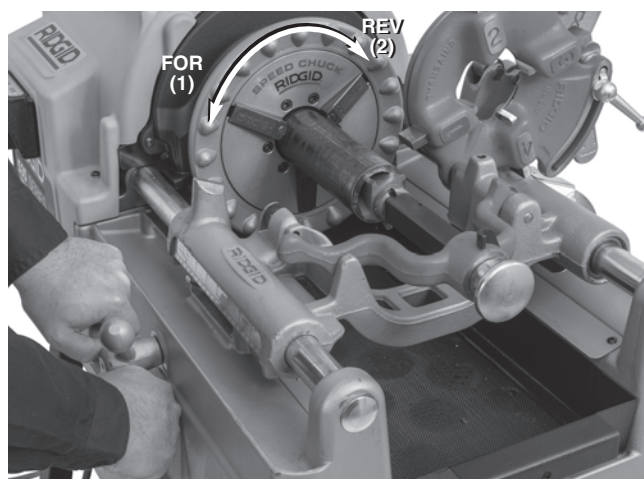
Reaming Pipe with Reamer, Machine Rotation
